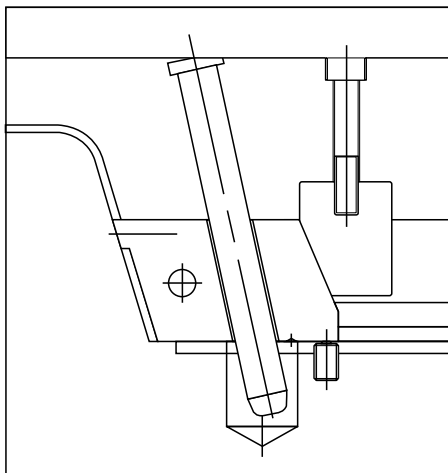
Slide Movement example using an angle pin and locking with a heel block (wedge).
